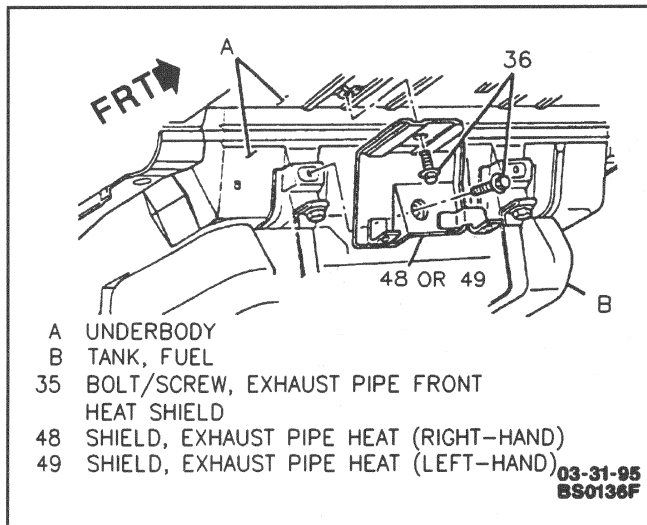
Exhaust Pipe and Fuel Tank Front Heat Shields (Wagon)
